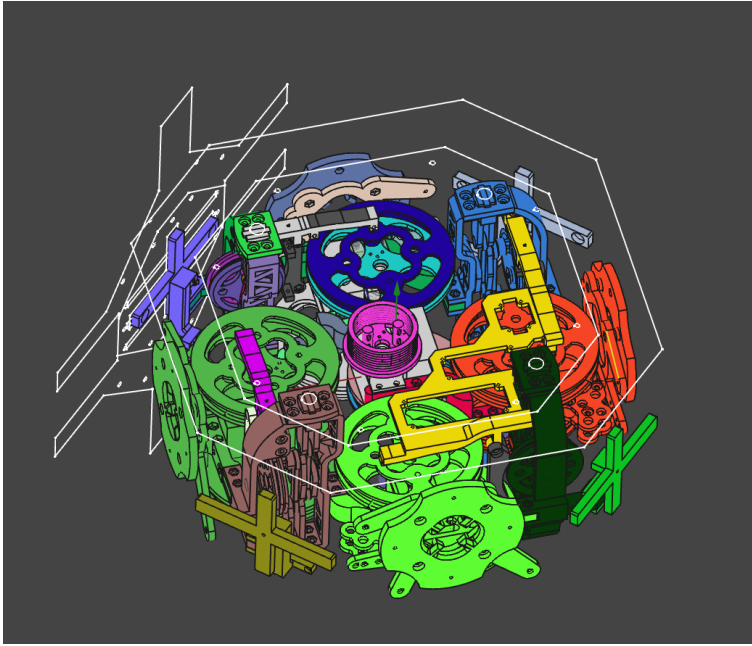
Preview of the *ASSEMBLY.FCStd* CAD file, showing the arrangement of all components.
